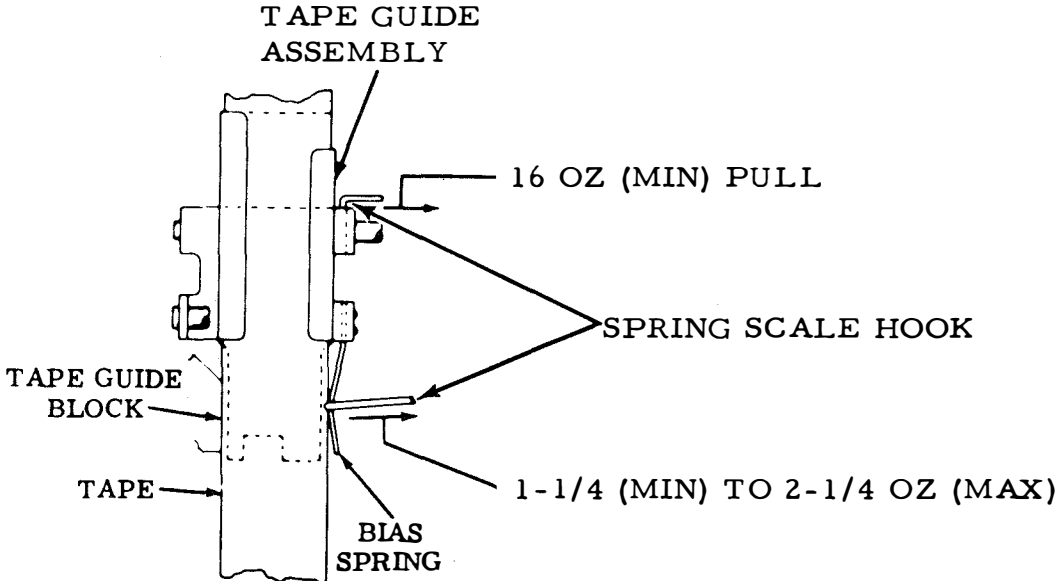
Tape Guide Assembly Spring and Tape Chute Bias Spring for Fully Perforated Tape - Top View
